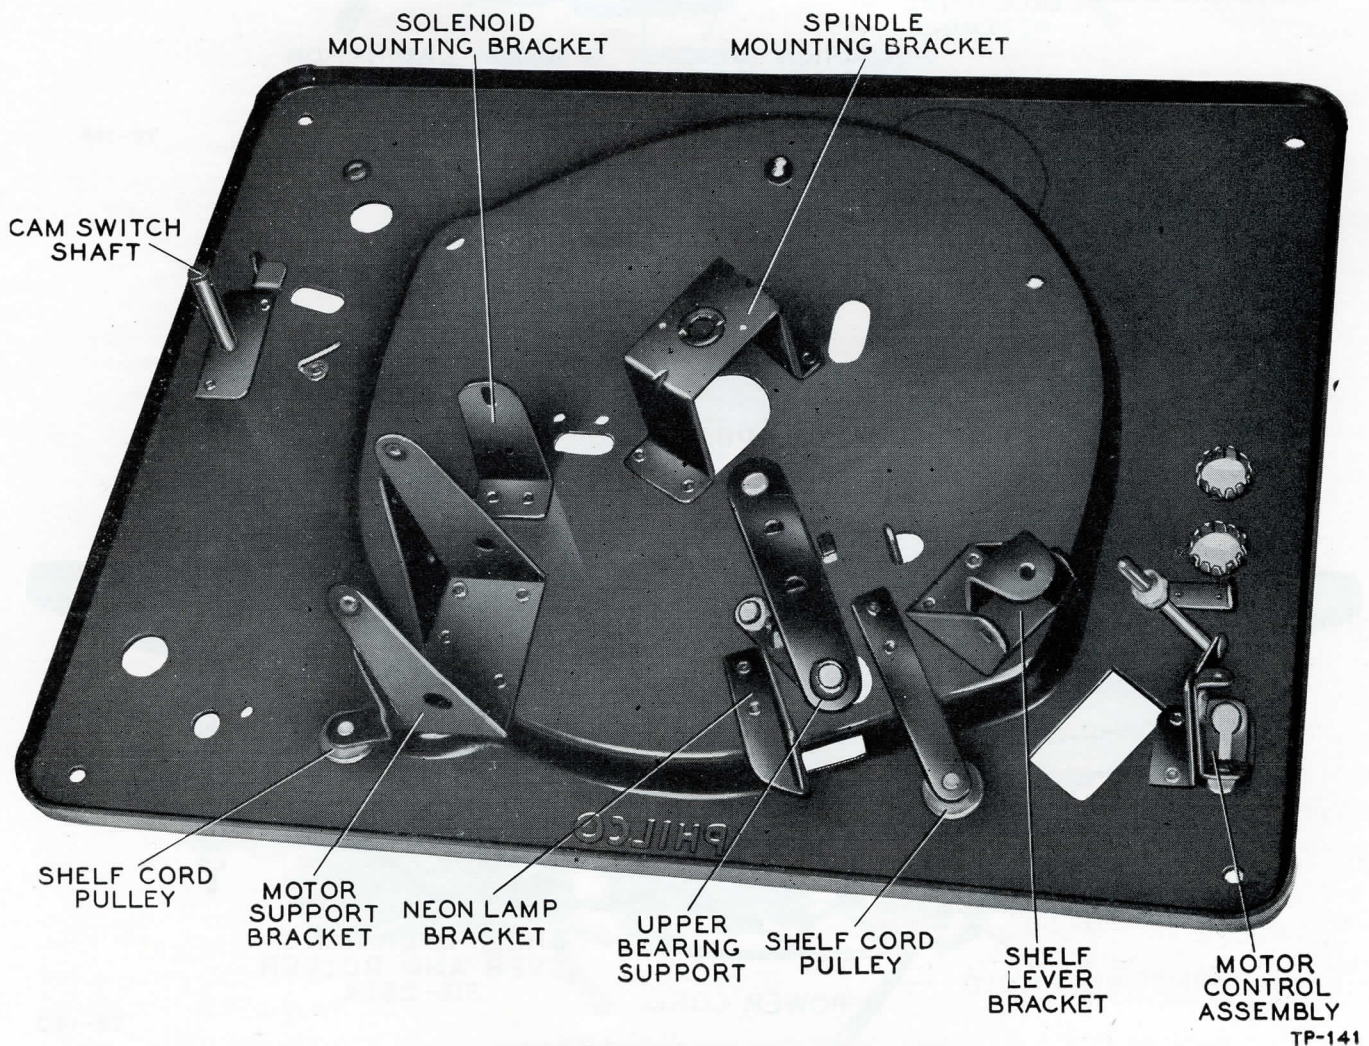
RIVETED ASSEMBLIES ON CHANGER BASE PLATE
